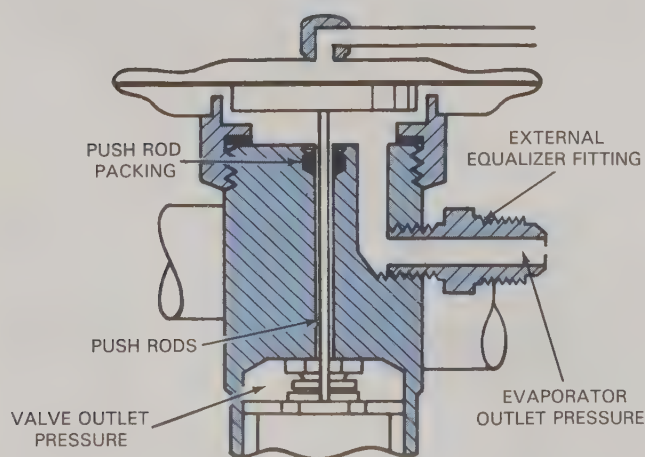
Externally equalized valve. The evaporator pressure is read from a point beyond the outlet, through tubing connected to a flare fitting.
